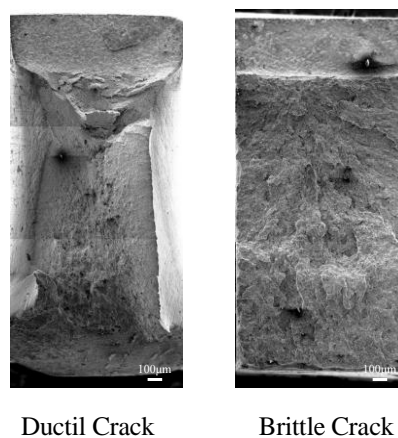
Fracture surface of the specimen after Charpy impact test
